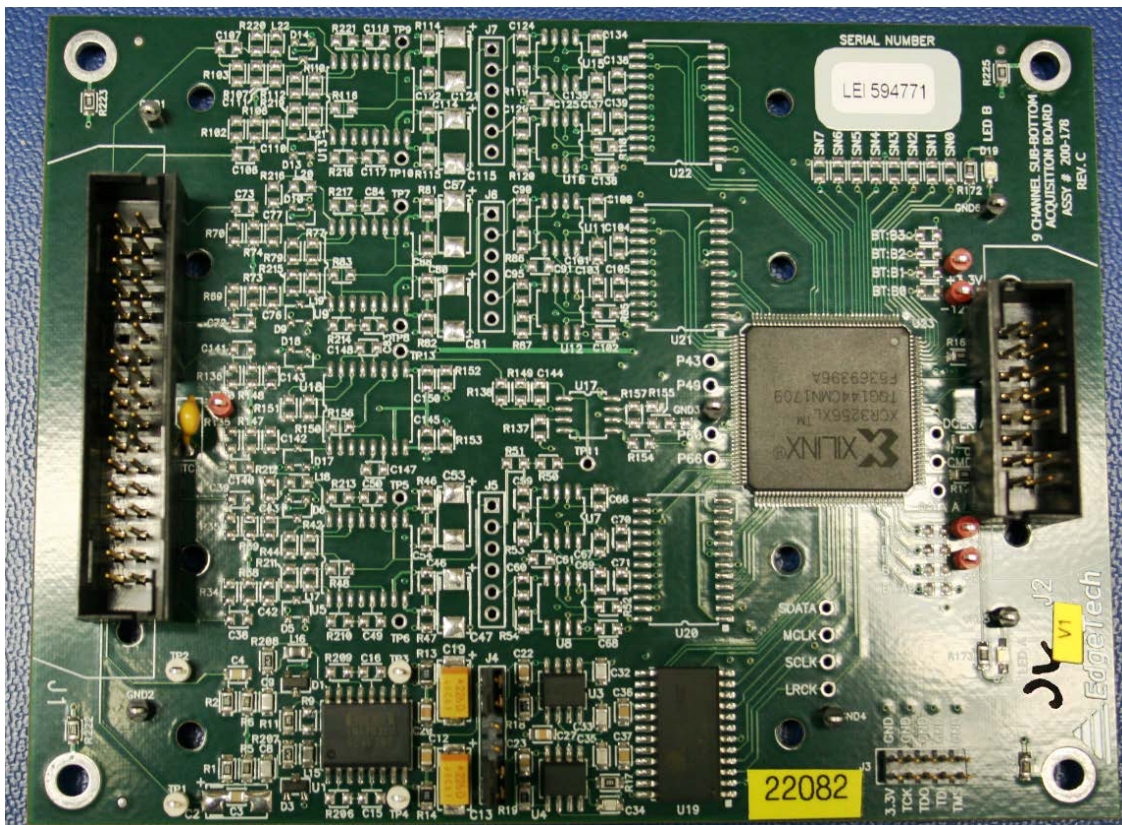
Tiger Board Set: Acquisition PCB - 0014231
